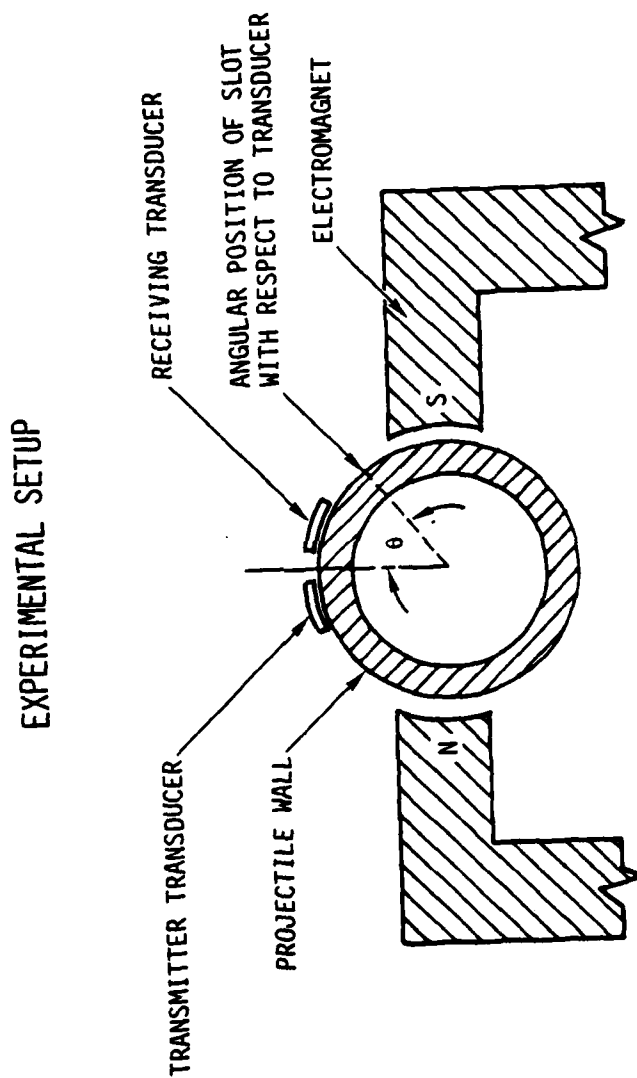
Magnet configuration for inspecting the M-549 projectile.
